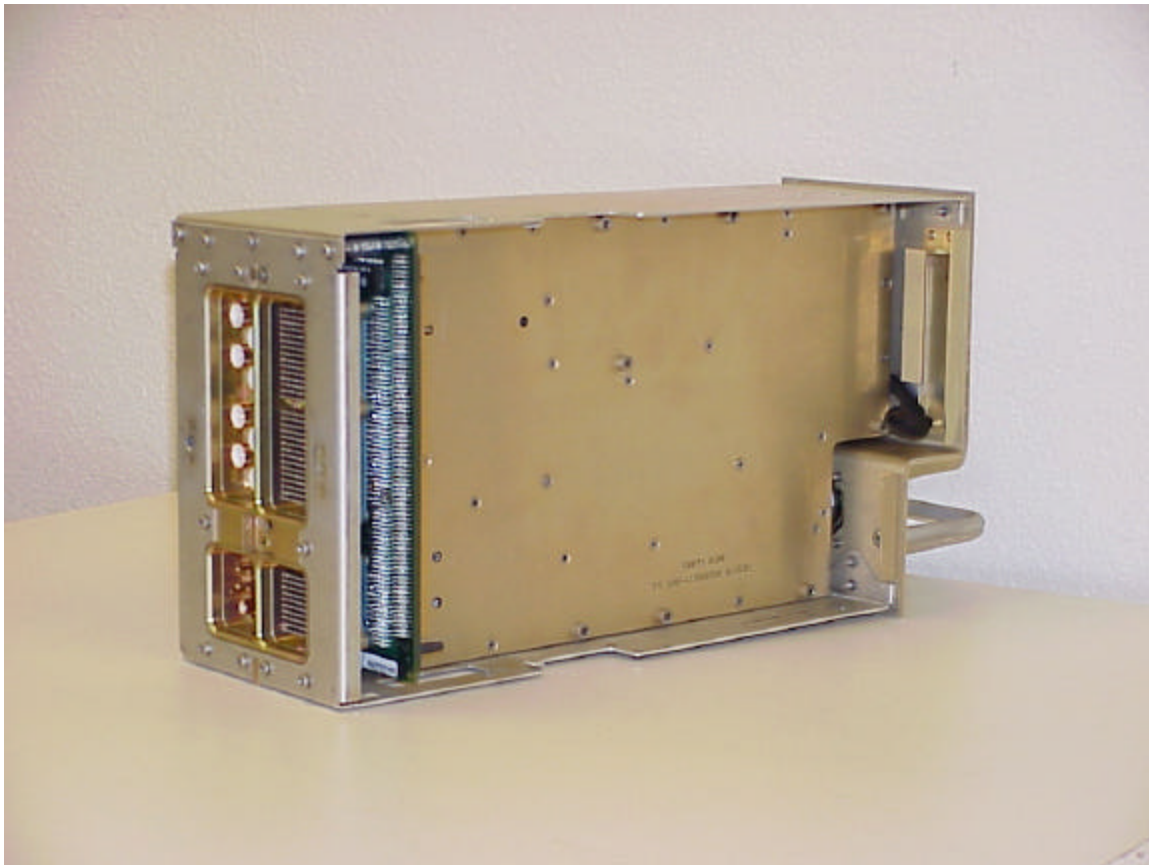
View of Unit Side with A2 Processor Removed Showing A3 Transmitter Assembly With Cover
